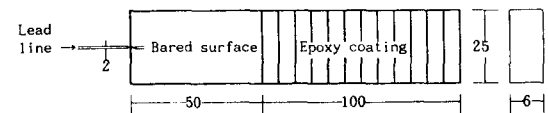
Dimension of epoxy coating test specimen(unit:mm).
